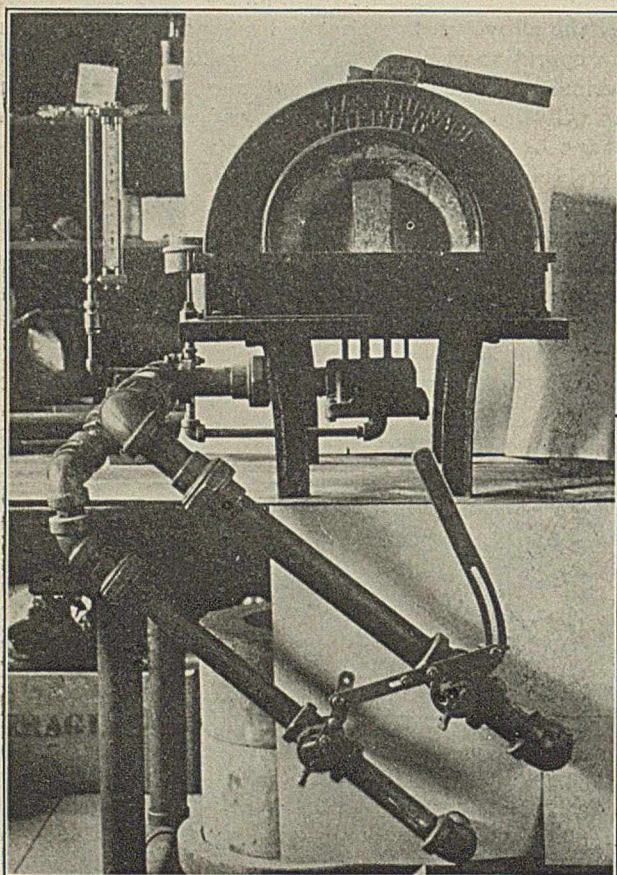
FRONT VIEW OF MUFFLE FURNACE, SHOWING RIBS, CARRYING THE MIXTURE FEED HOLES
